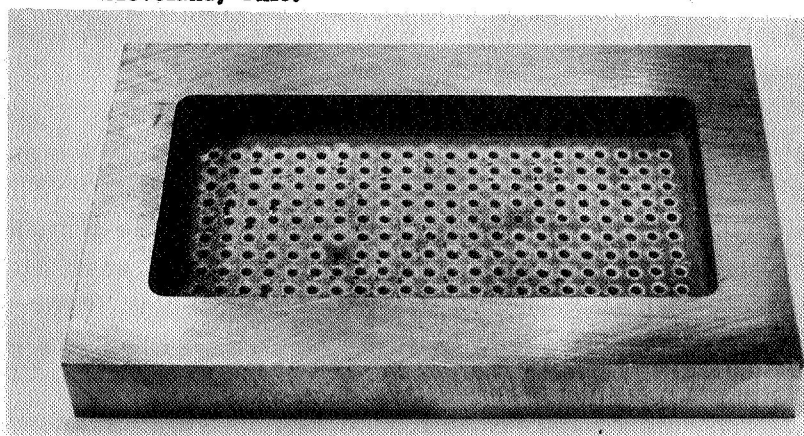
ECM DRILLING OF 304 STAINLESS STEEL BURNER PLATE (REF. 96)
